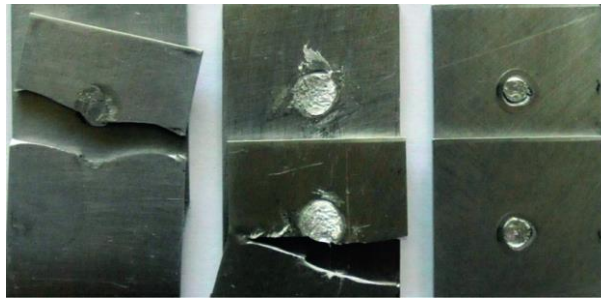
Fractured fatigue resistance spot welding specimens.
